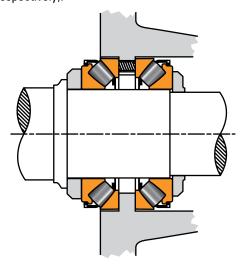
Back-to-back mounting arrangement of a TSR-EJ bearing set.
